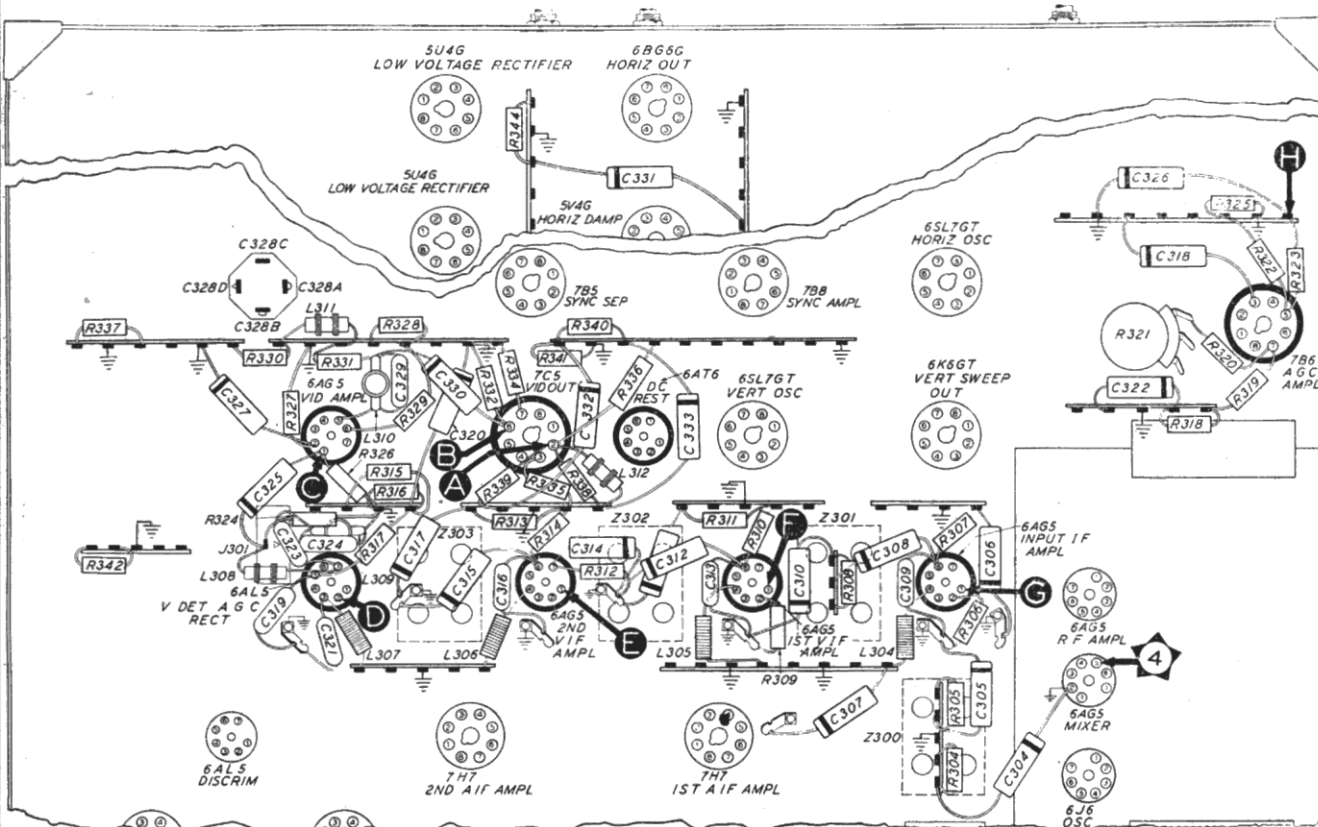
BOTTOM VIEW, SHOWING SECTION 3 TEST POINTS
